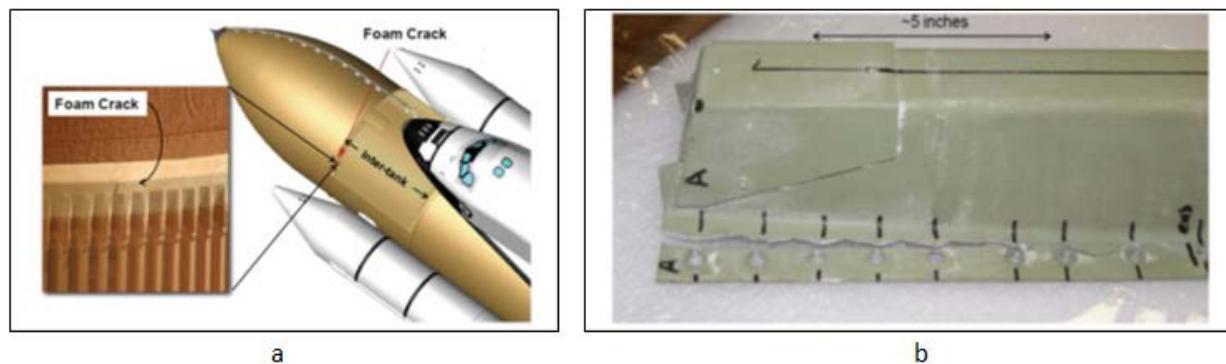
Right (b) Photo Shows Al-Li Stringer End Region Containing a Crack Adjacent Flange Fastener Holes. The Cracked Flange Defection Caused ET Inter-Tank Foam Cracks, Left (a) Photo.
